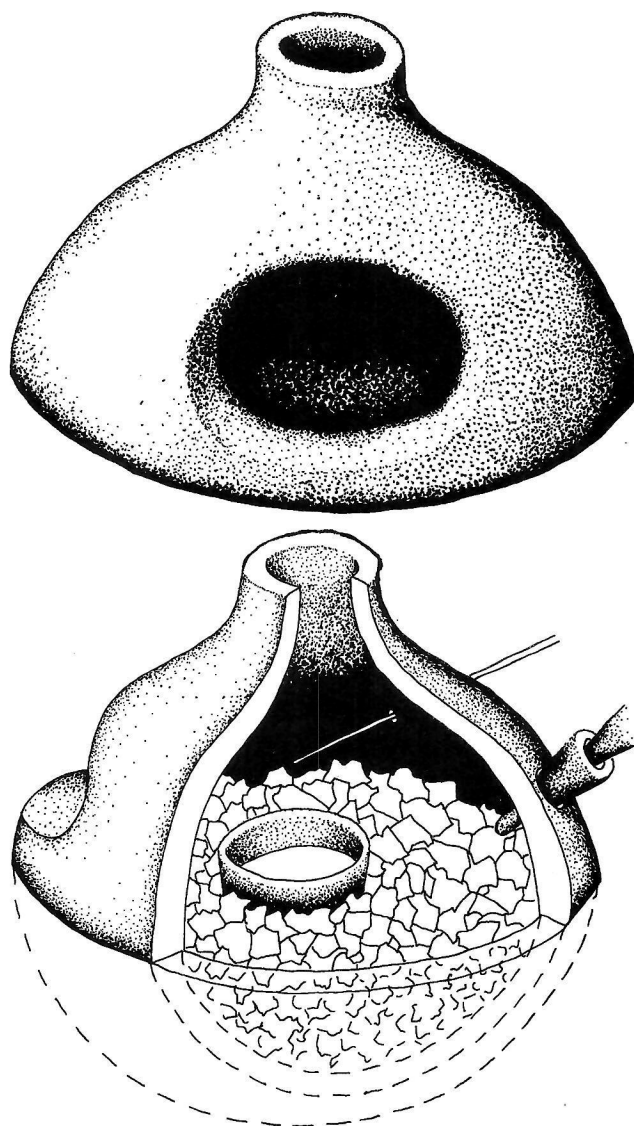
Front view and cutaway side view of furnace showing crucible, probe and tuyere.
